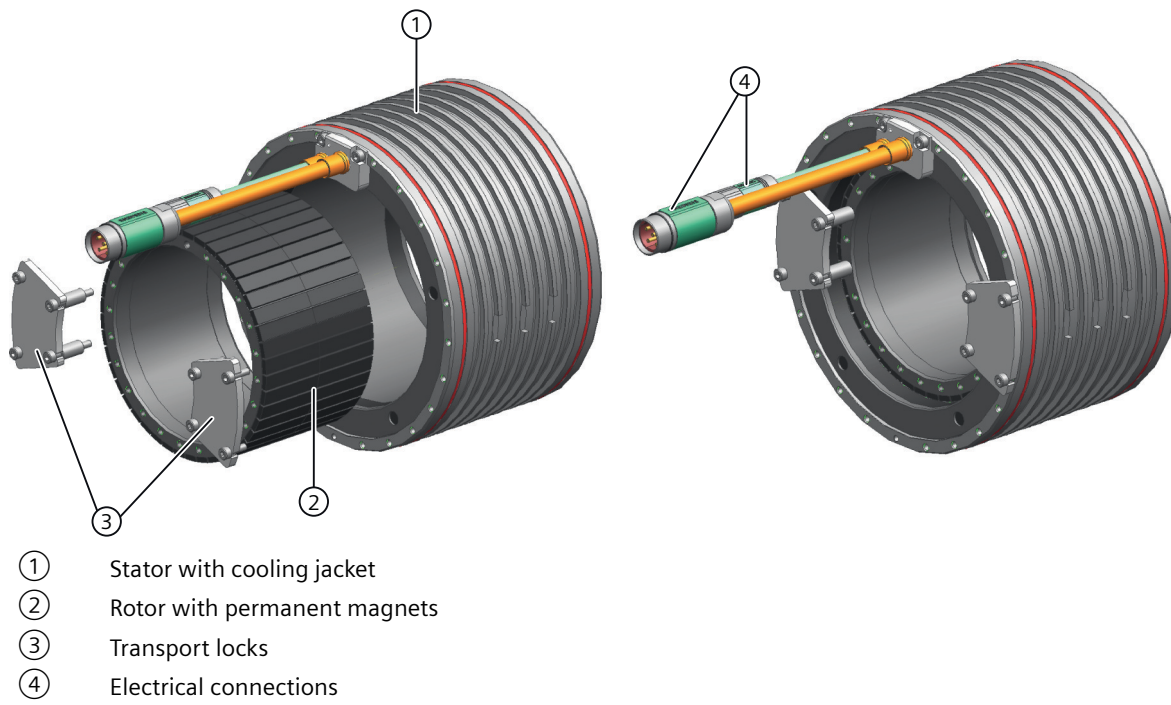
Motor components of the 1FW6090, 1FW6130 and 1FW6150 built-in torque motors with cooling jacket
